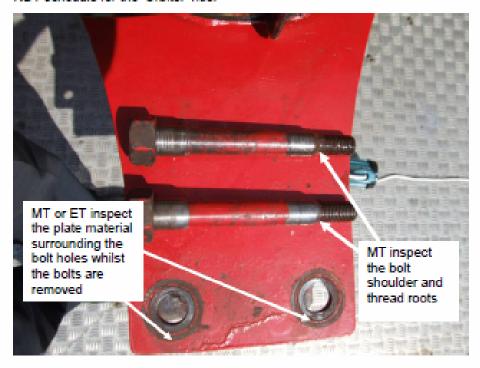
View looking down on the seat attachment arm with the seat assembly removed.
